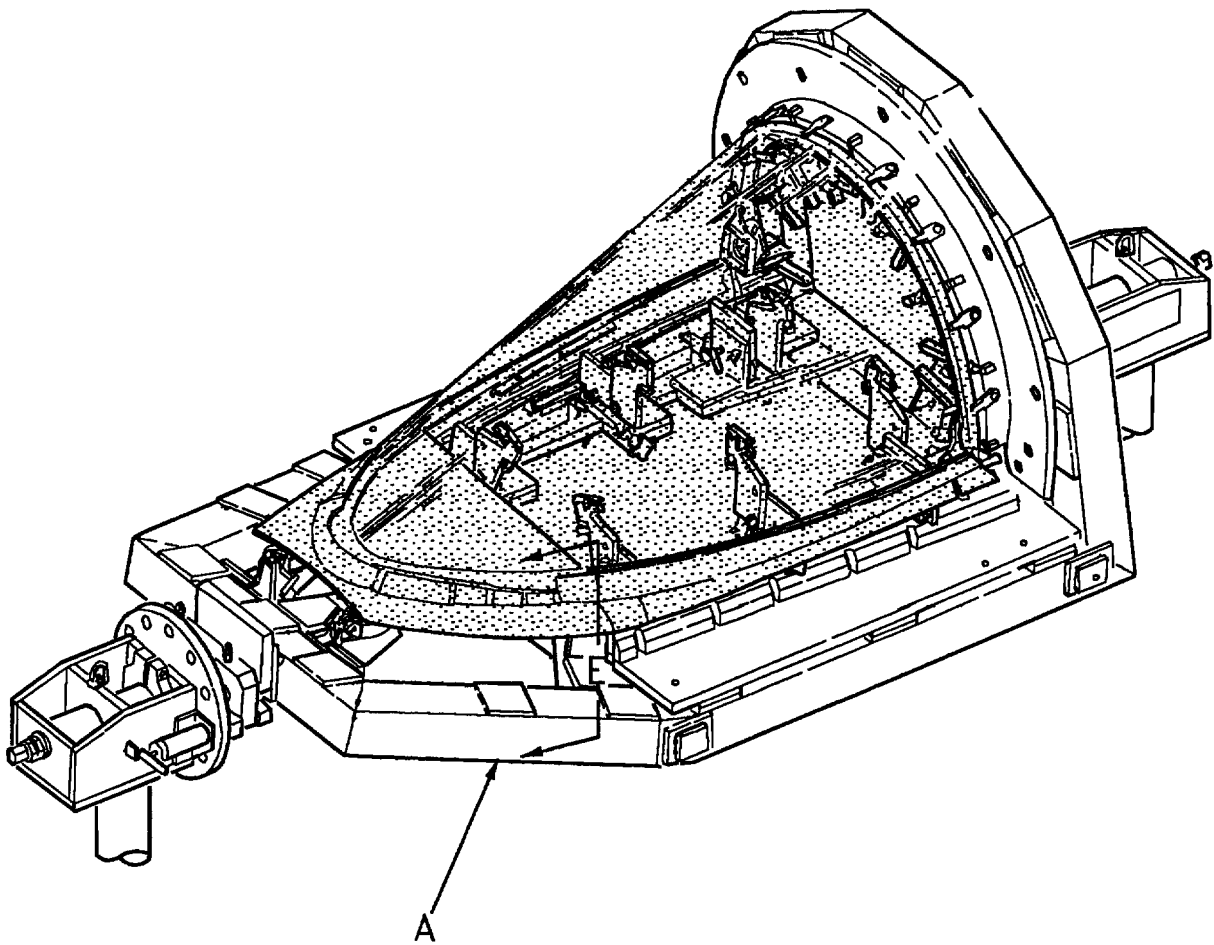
Inspection or Replacement - Seal Retainer (Sheet 1)
